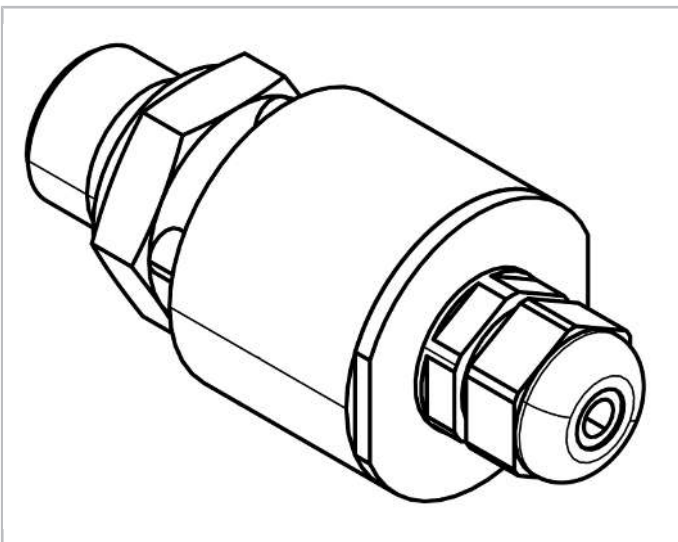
Sketch of the component for explosion protected smaller reciprocating compressors of construction size 1 and 2 (part no. 347 340 02)
